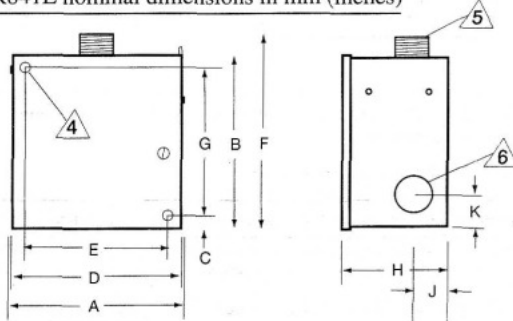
R841C,D nominal dimensions in millimeters. (inches)
